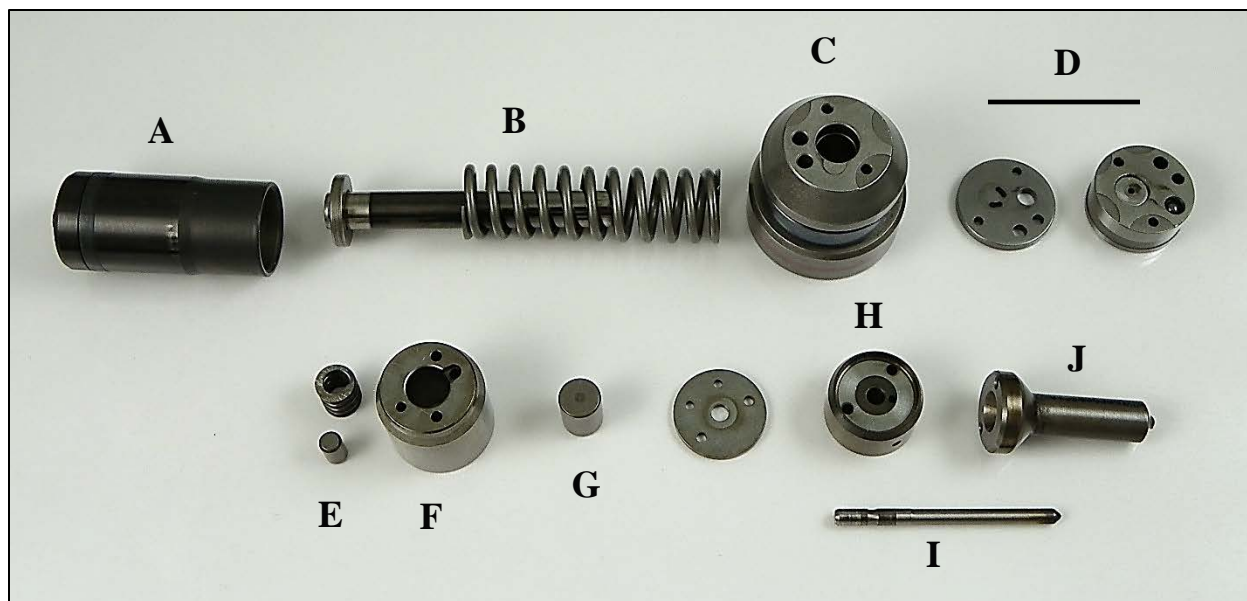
C7 HEUI Injector Barrel Assembly Exploded View
